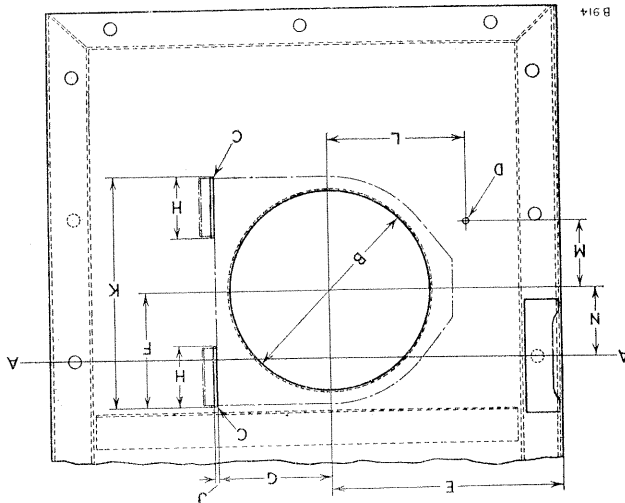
Cutting and drilling seat box centre inspection panel, early type
